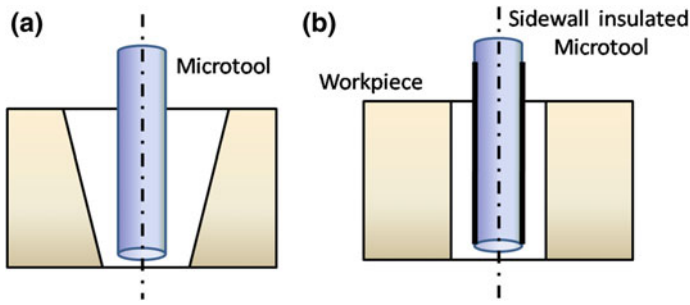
Machining with a cylindrical microtool and b sidewall-insulated cylindrical microtool
